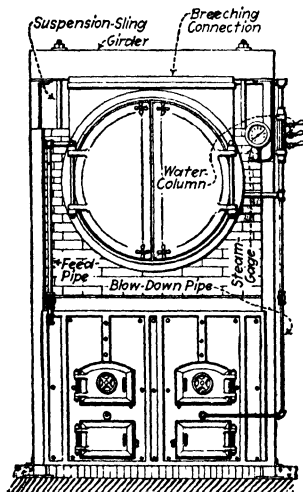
Front elevation of horizontal return-tubular boiler.
